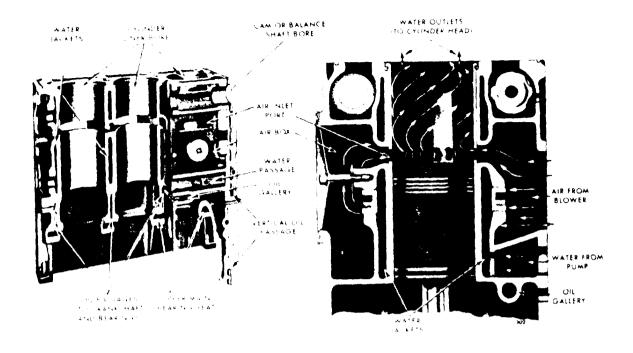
B-2. Cutaway of Cylinder Block Showing Air and Water Passages
